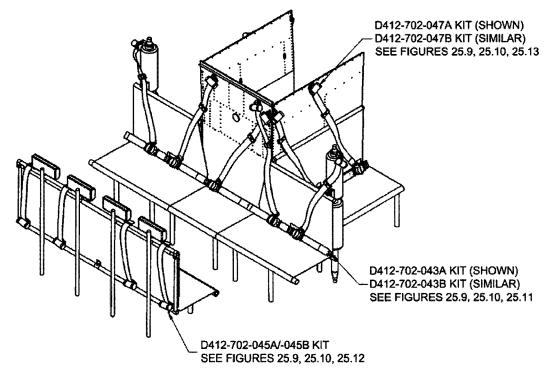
DART D412-702-041A 13-MAN 3-POINT SHOULDER HARNESS KIT (D412-702-041B KIT SIMILAR)
